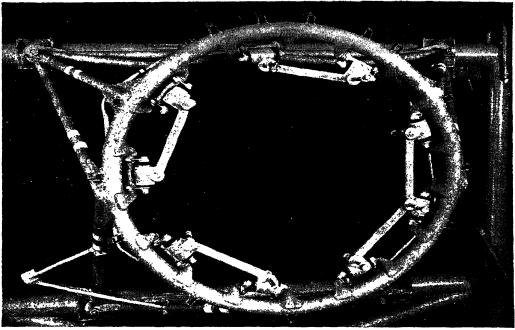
A welded-steel-tube engine mount with the rubber shock mounts installed to receive the engine. (Courtesy of Lord Mfg. Co.)
